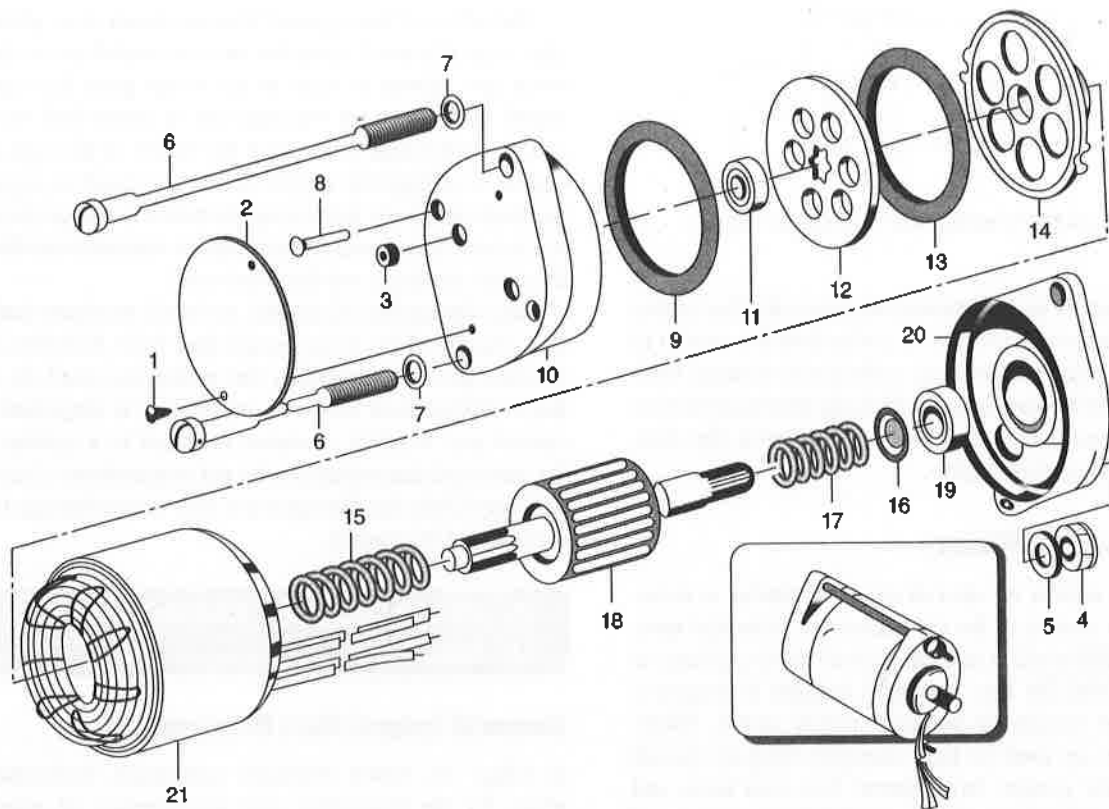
Exploded view of a single-phase reversible ac motor: (1) identification-plate screw, (2) identification plate, (3) adjusting screw, (4) main assembly nut, (5) washer, (6) main assembly screw, (7) washer, (8) aligning pin, (9) brake lining, (10) end bell, (11) ball bearing, (12) break disk, (13) brake lining, (14) brake armature, (15) brake spring, (16) spring retainer washer, (17) compression spring, (18) rotor assembly, (19) ball bearing, (20) motor base, (21) stator assembly.
